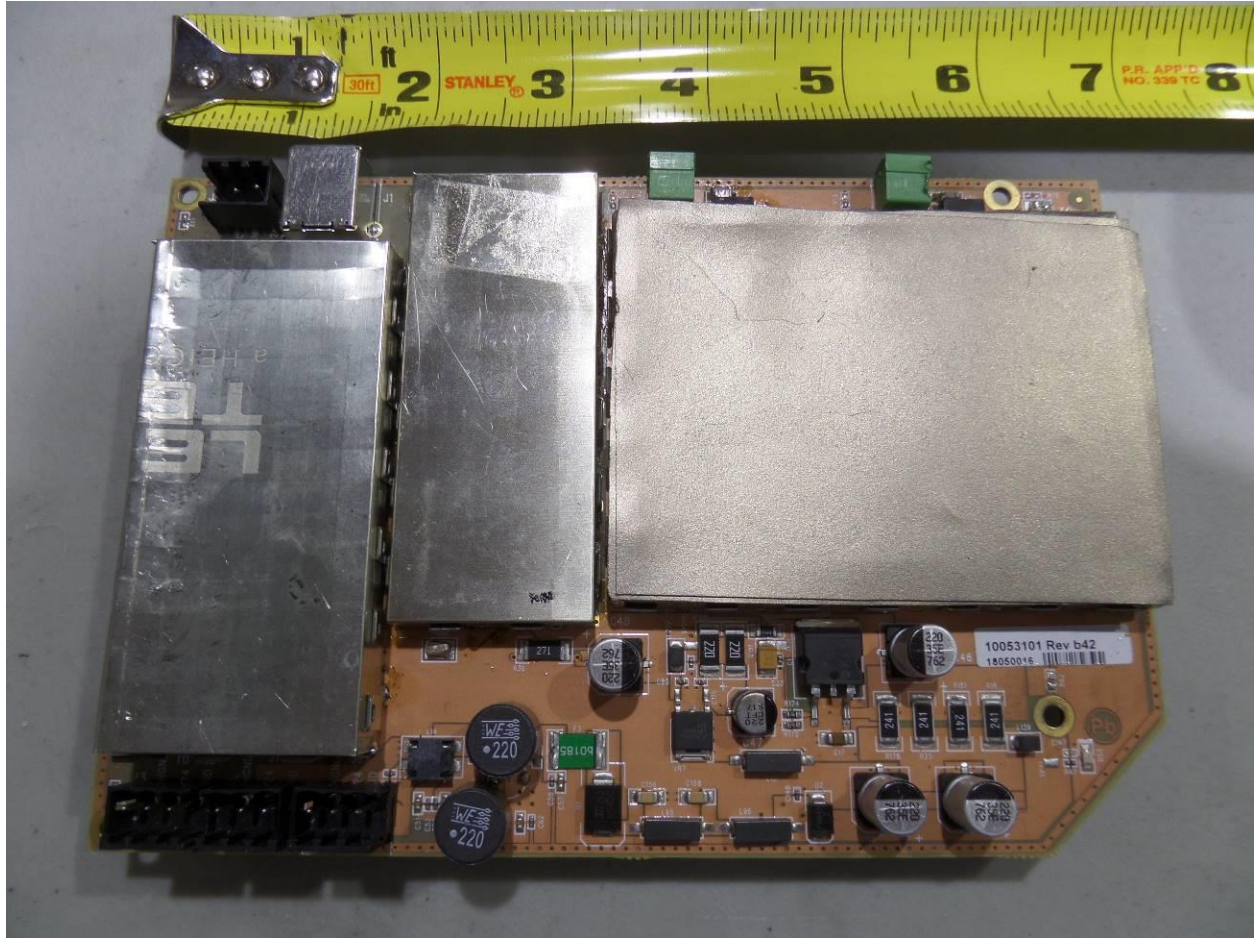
TR4300 RF EAS TX_RX PCB bottom side
